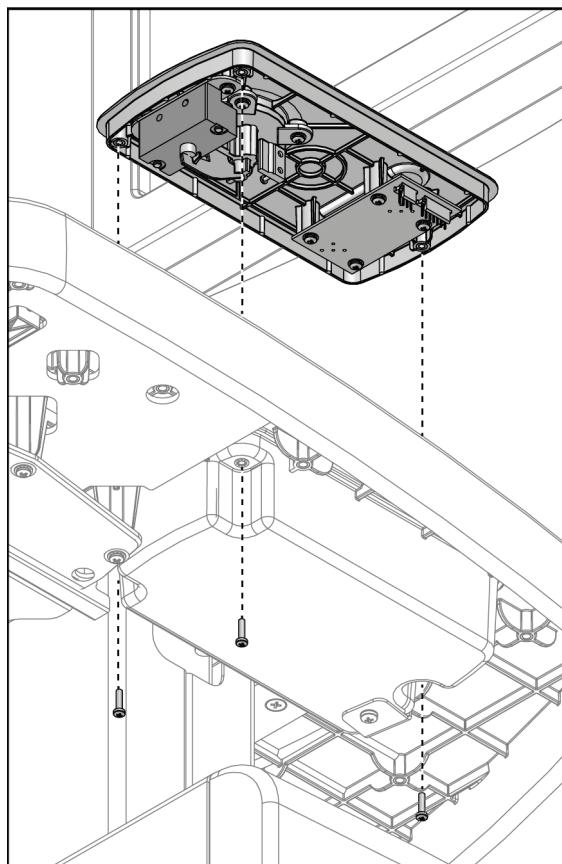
Removing the assembly from its housing (shows all cables already disconnected)
